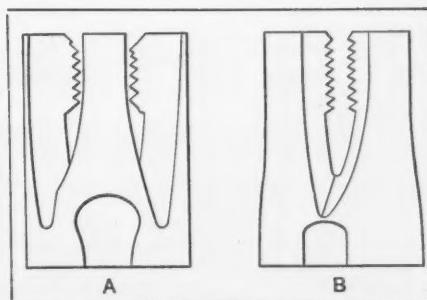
Incorrect and Correct Methods of spotting Spring Screw Threading Dies for Set-screw
